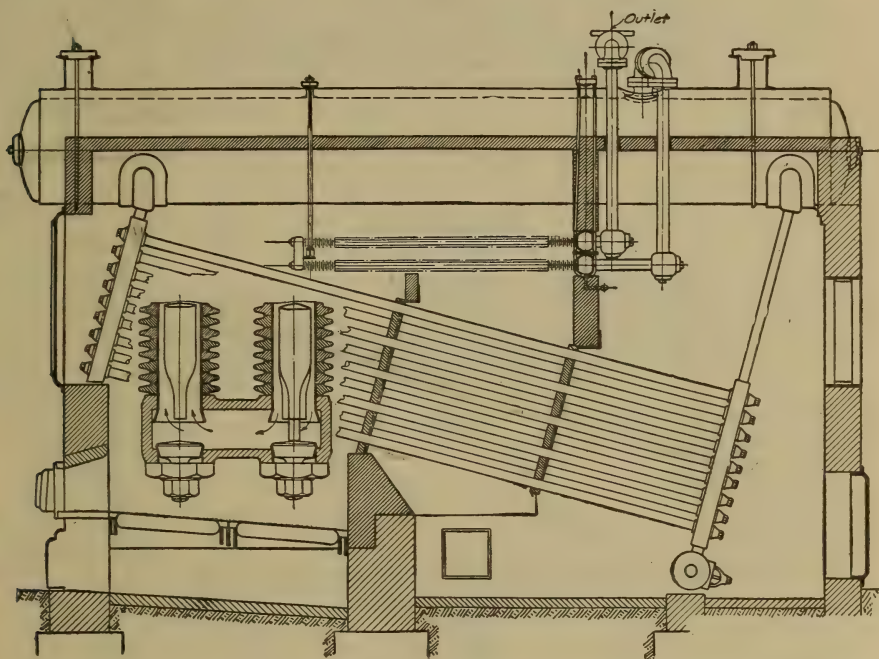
Foster Superheater in Babcock and Wilcox Boiler.
